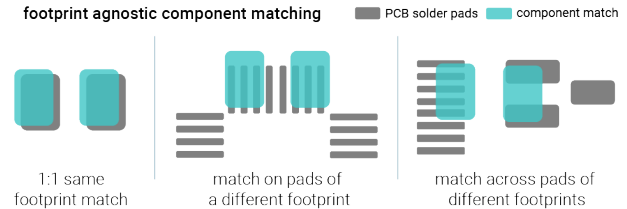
Using a footprint-agnostic component matching approach, ProtoPCB does not need to match components to their exact footprint but, instead, can find diverse placement options that maximize the solderable pad area for component pins.
